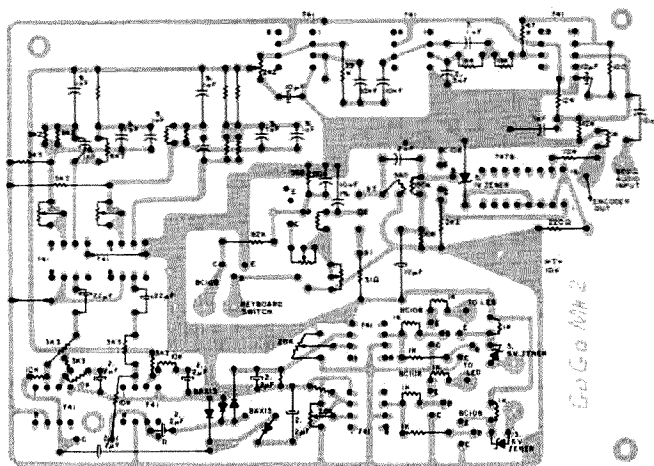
Encoder-decoder PC board and component layout. \*Jumper emitter of TR7 to positive rail.
